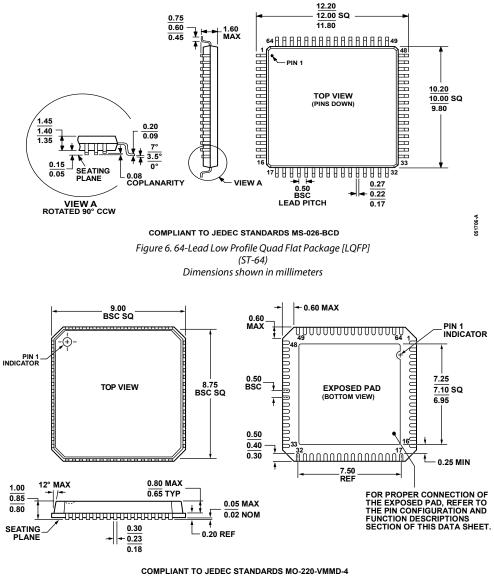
64-Lead Lead Frame Chip Scale Package [LFCSP\_VQ] 9 mm × 9 mm Body, Very Thin Quad (CP-64-3) Dimensions shown in millimeters
